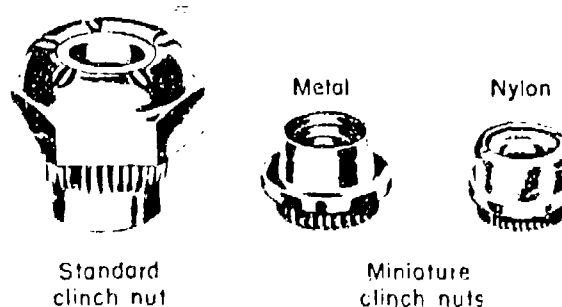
Self-locking nuts that may be clinched into panel and anchored by riveting or welding. (Courtesy of Elastic Stop Nut Corp.)
